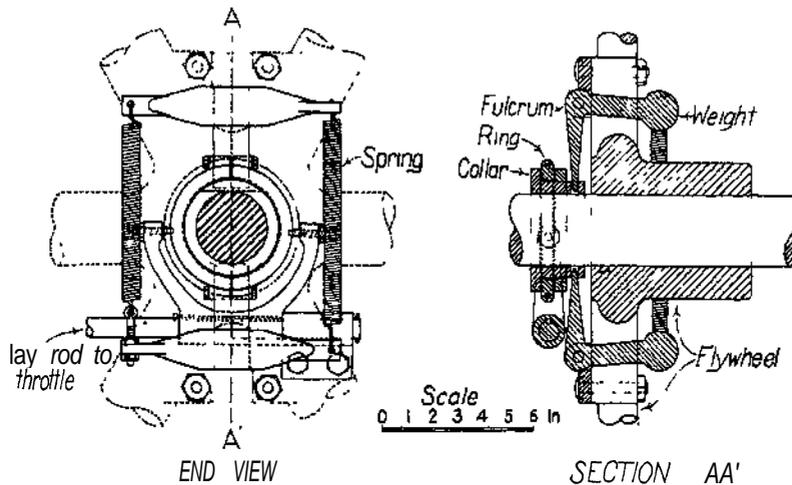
Design of the shaft governor of Engine No. 5. The lay rod extends to the head end of the engine where it controls the throttle valve between the carburetor and the cylinder.
